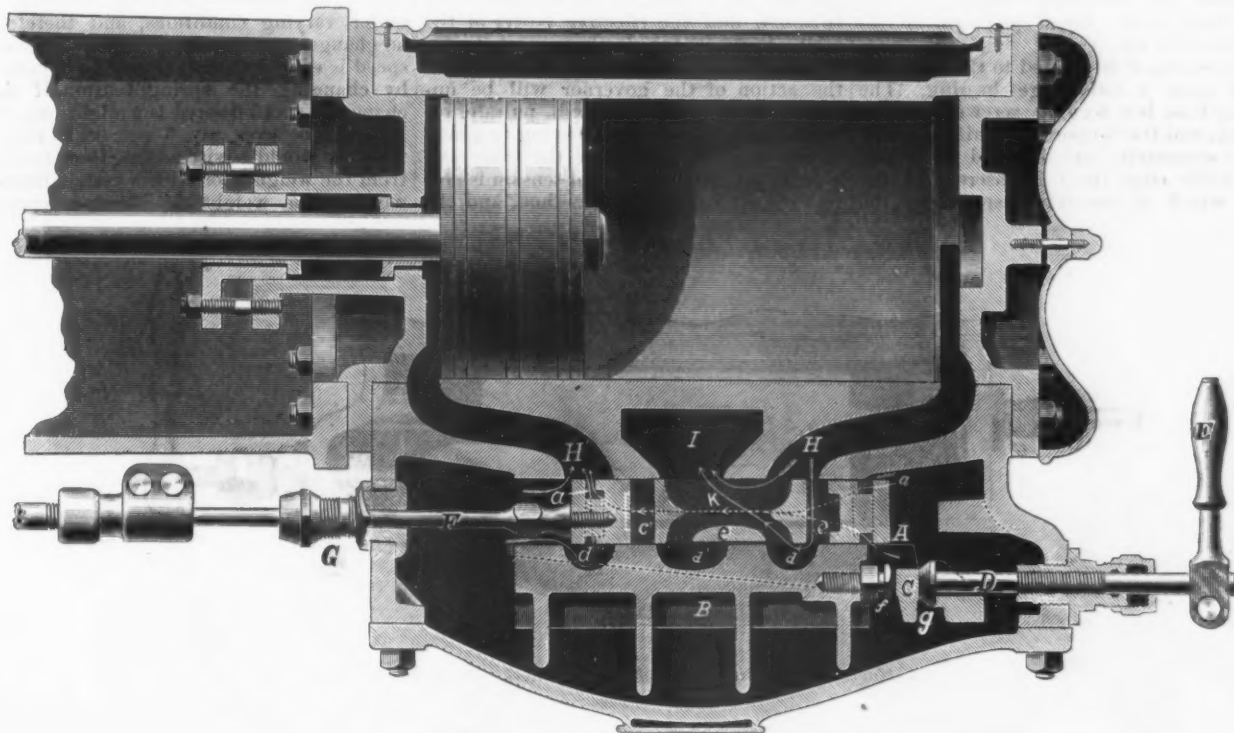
Horizontal Section through Cylinder, Steam Chest and Valve.
